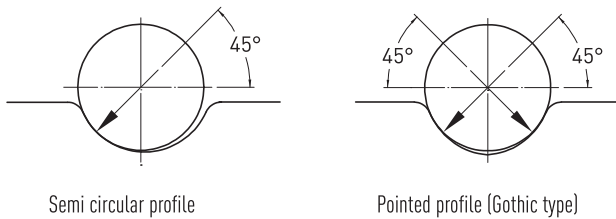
Typical types of contact in ballscrews (semi circular type, Gothic type)
